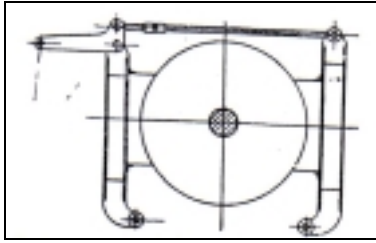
Straight Type Post Brake (Jeppe, 1946 : 1128)
